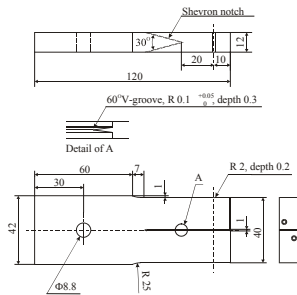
Shape and dimensions of Mode II fatigue crack growth test specimen (mm).
